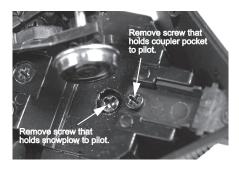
Remove the screws holding the snowplow and coupler pocket to the pilot.
